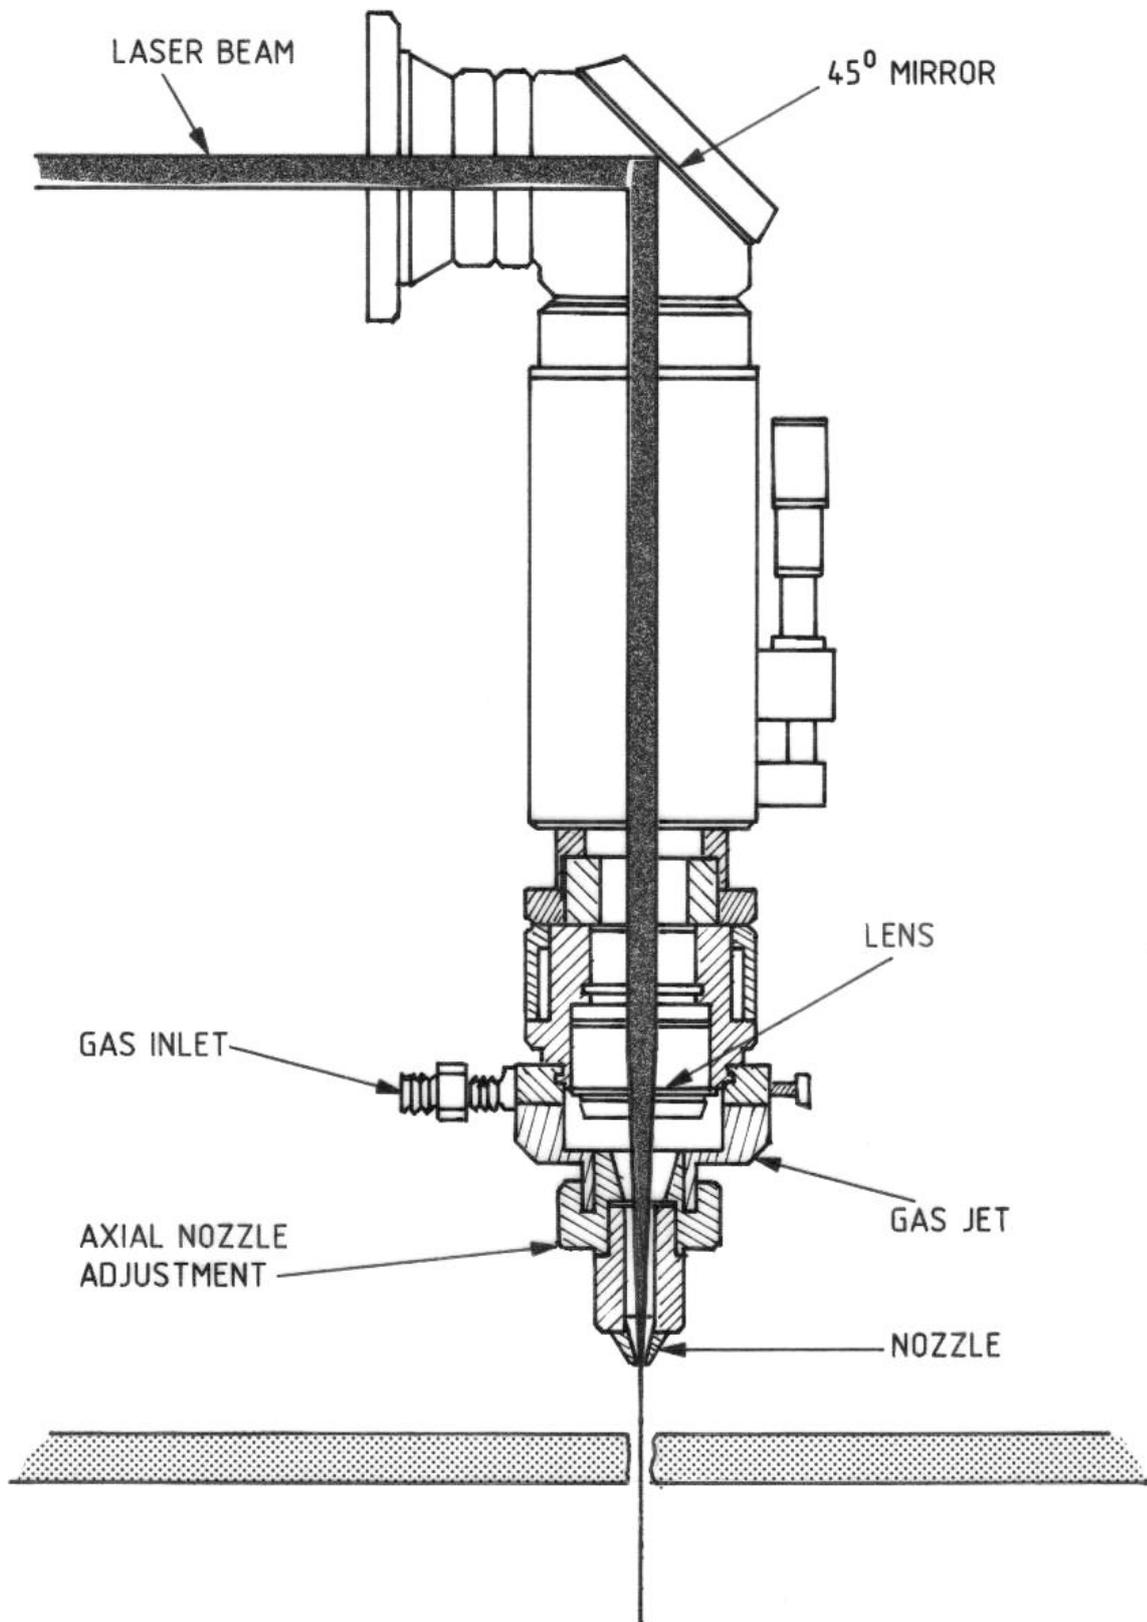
2. Laser cutting head showing laser beam path. (after J. Powel 76)
